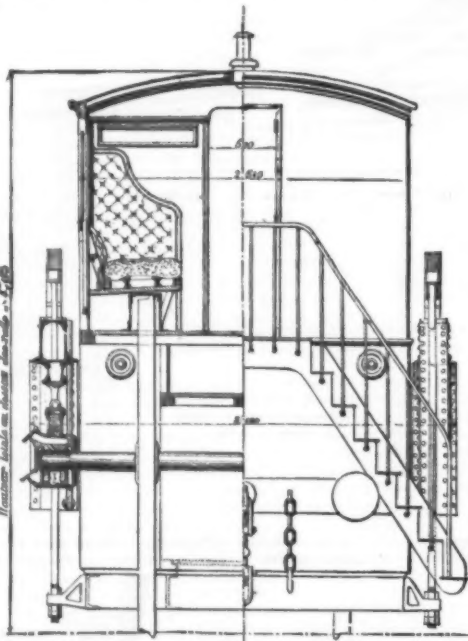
CROSS SECTION AND REAR VIEW OF PASSENGER CAR.
